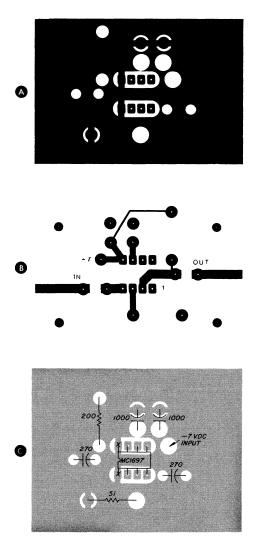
The top and bottom sides of the printed circuit board are shown in A and B respectively. In the parts placement diagram, C, C1, and C2 are installed on the top of the board if glass or mica capacitors are used; if chip ceramics are used, they are mounted on the foil side. The leads marked with an X are to be soldered on the ground plane side.
